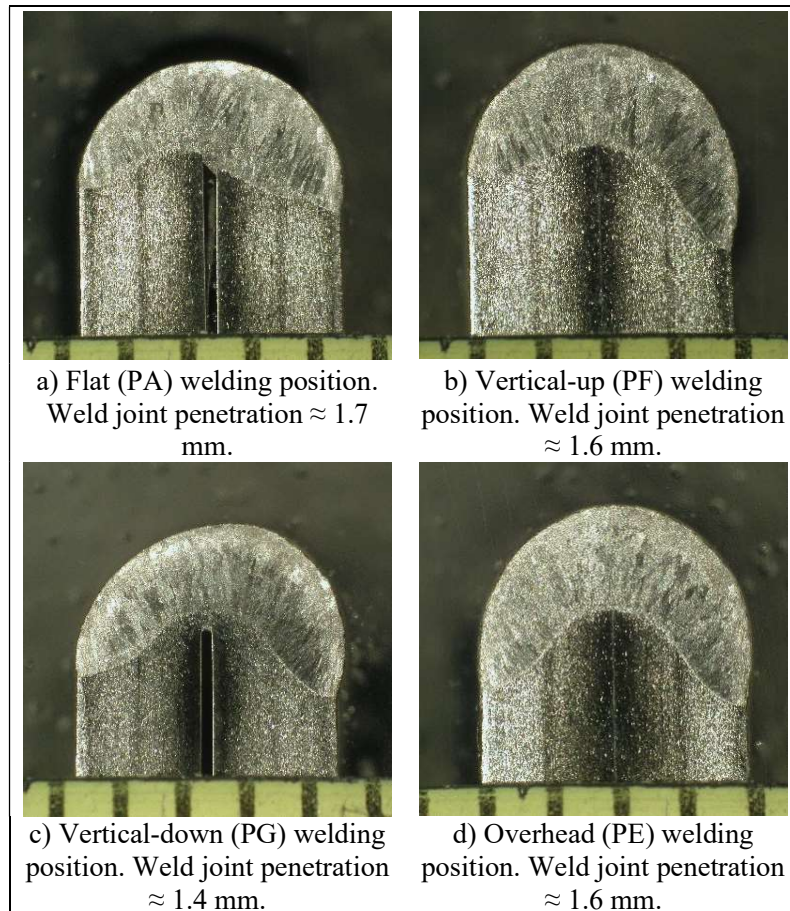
Edge joint weld cross-sections (a-d) produced with optimized welding parameters using a plain argon shielding gas composition in experiments of phase 1. In the scale strip, one interval corresponds to 1 mm.
